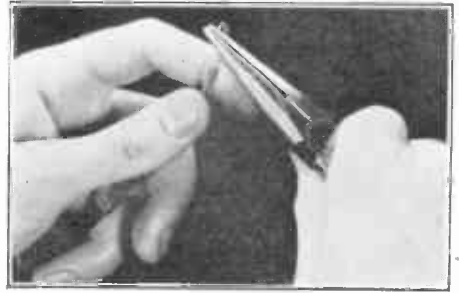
Forming a hook on solid wire with long-nose pliers, preparatory to making a soldered hook joint.
